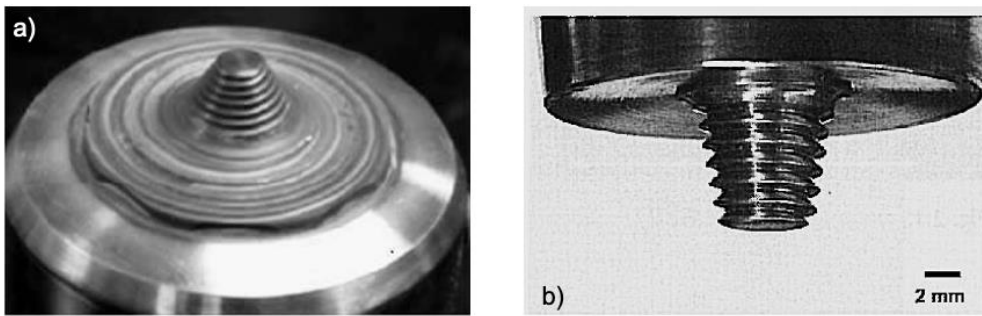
Shapes of the FSW tool shoulder: a) convex and scrolled [17], b) concave [18].
